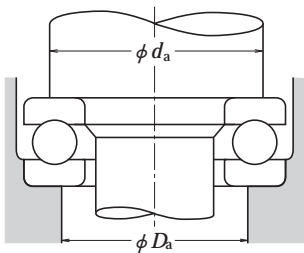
Face Supporting Diameters for Thrust Ball Bearings
